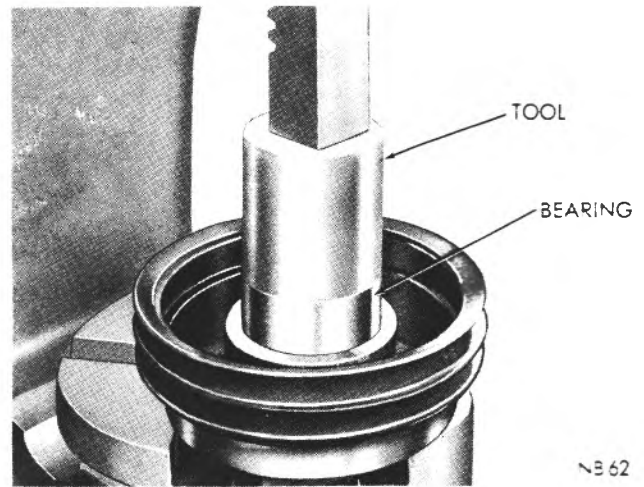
Installing a New Bearing in the Pulley Assembly (Typical)
